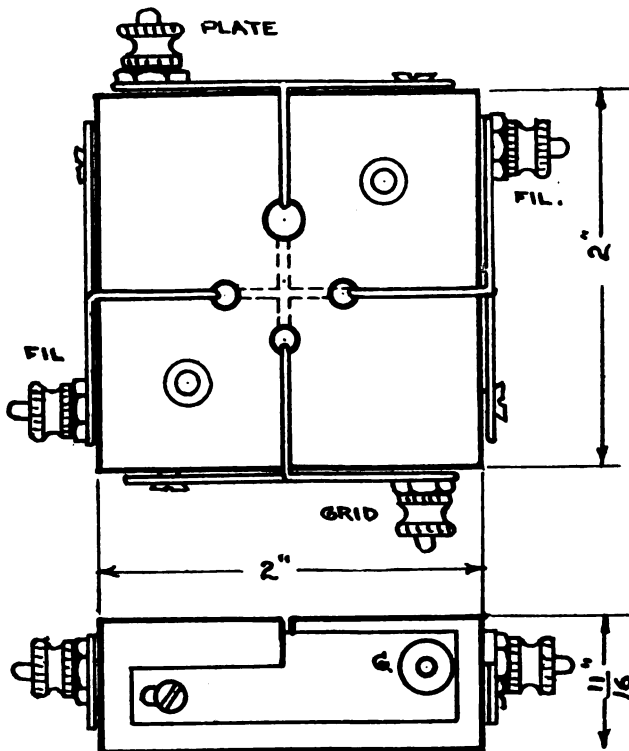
Assembly of a WD-11 socket as explained in the accompanying text. The exact dimensions are given and should be strictly followed. A neat and practical socket will result.
